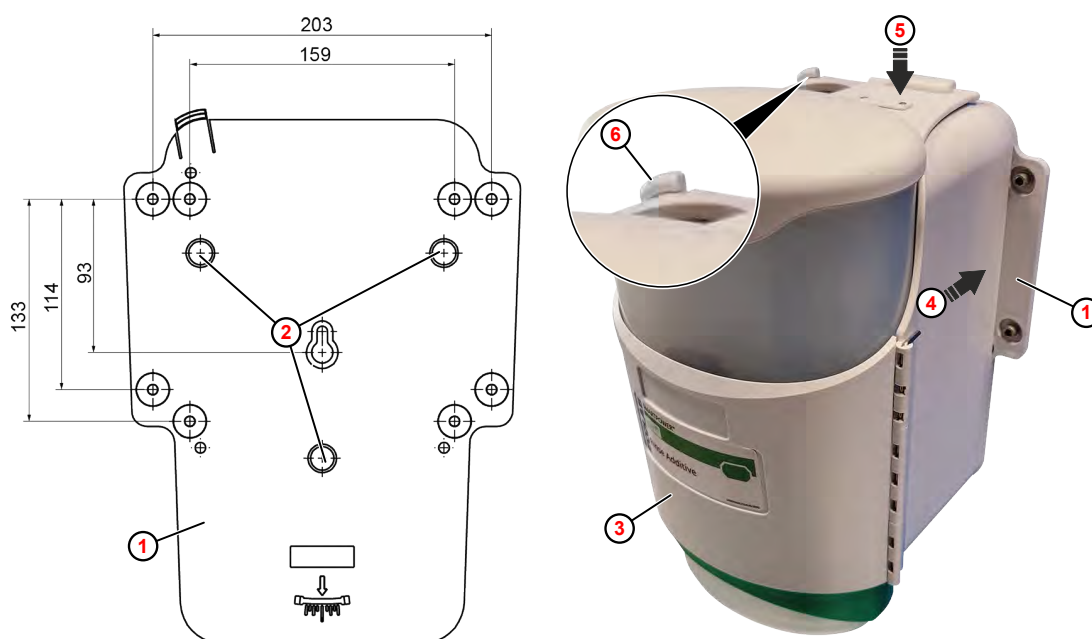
Mounting the unit (with the rinse dispenser as an example)
